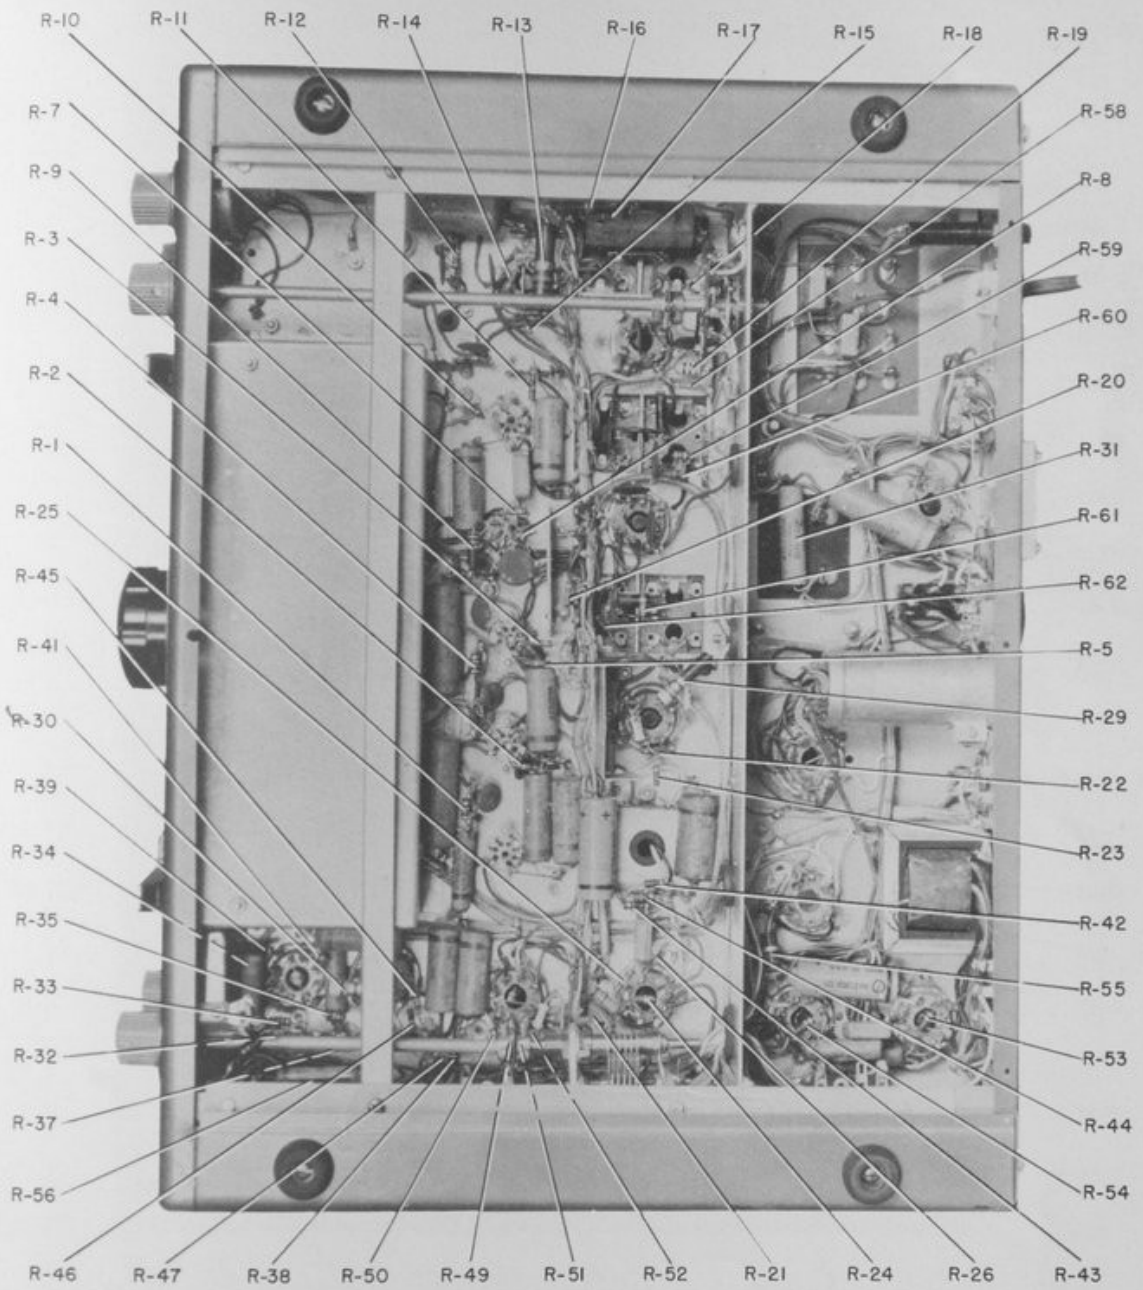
A. Resistor Locations, Bottom View of Receiver
